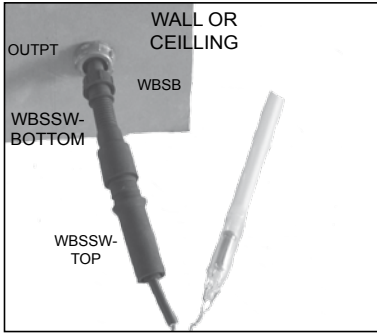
Slide top part of Wetbits Short Sleeve Wide over WB3760 sleeving and GTO cable assembly.
